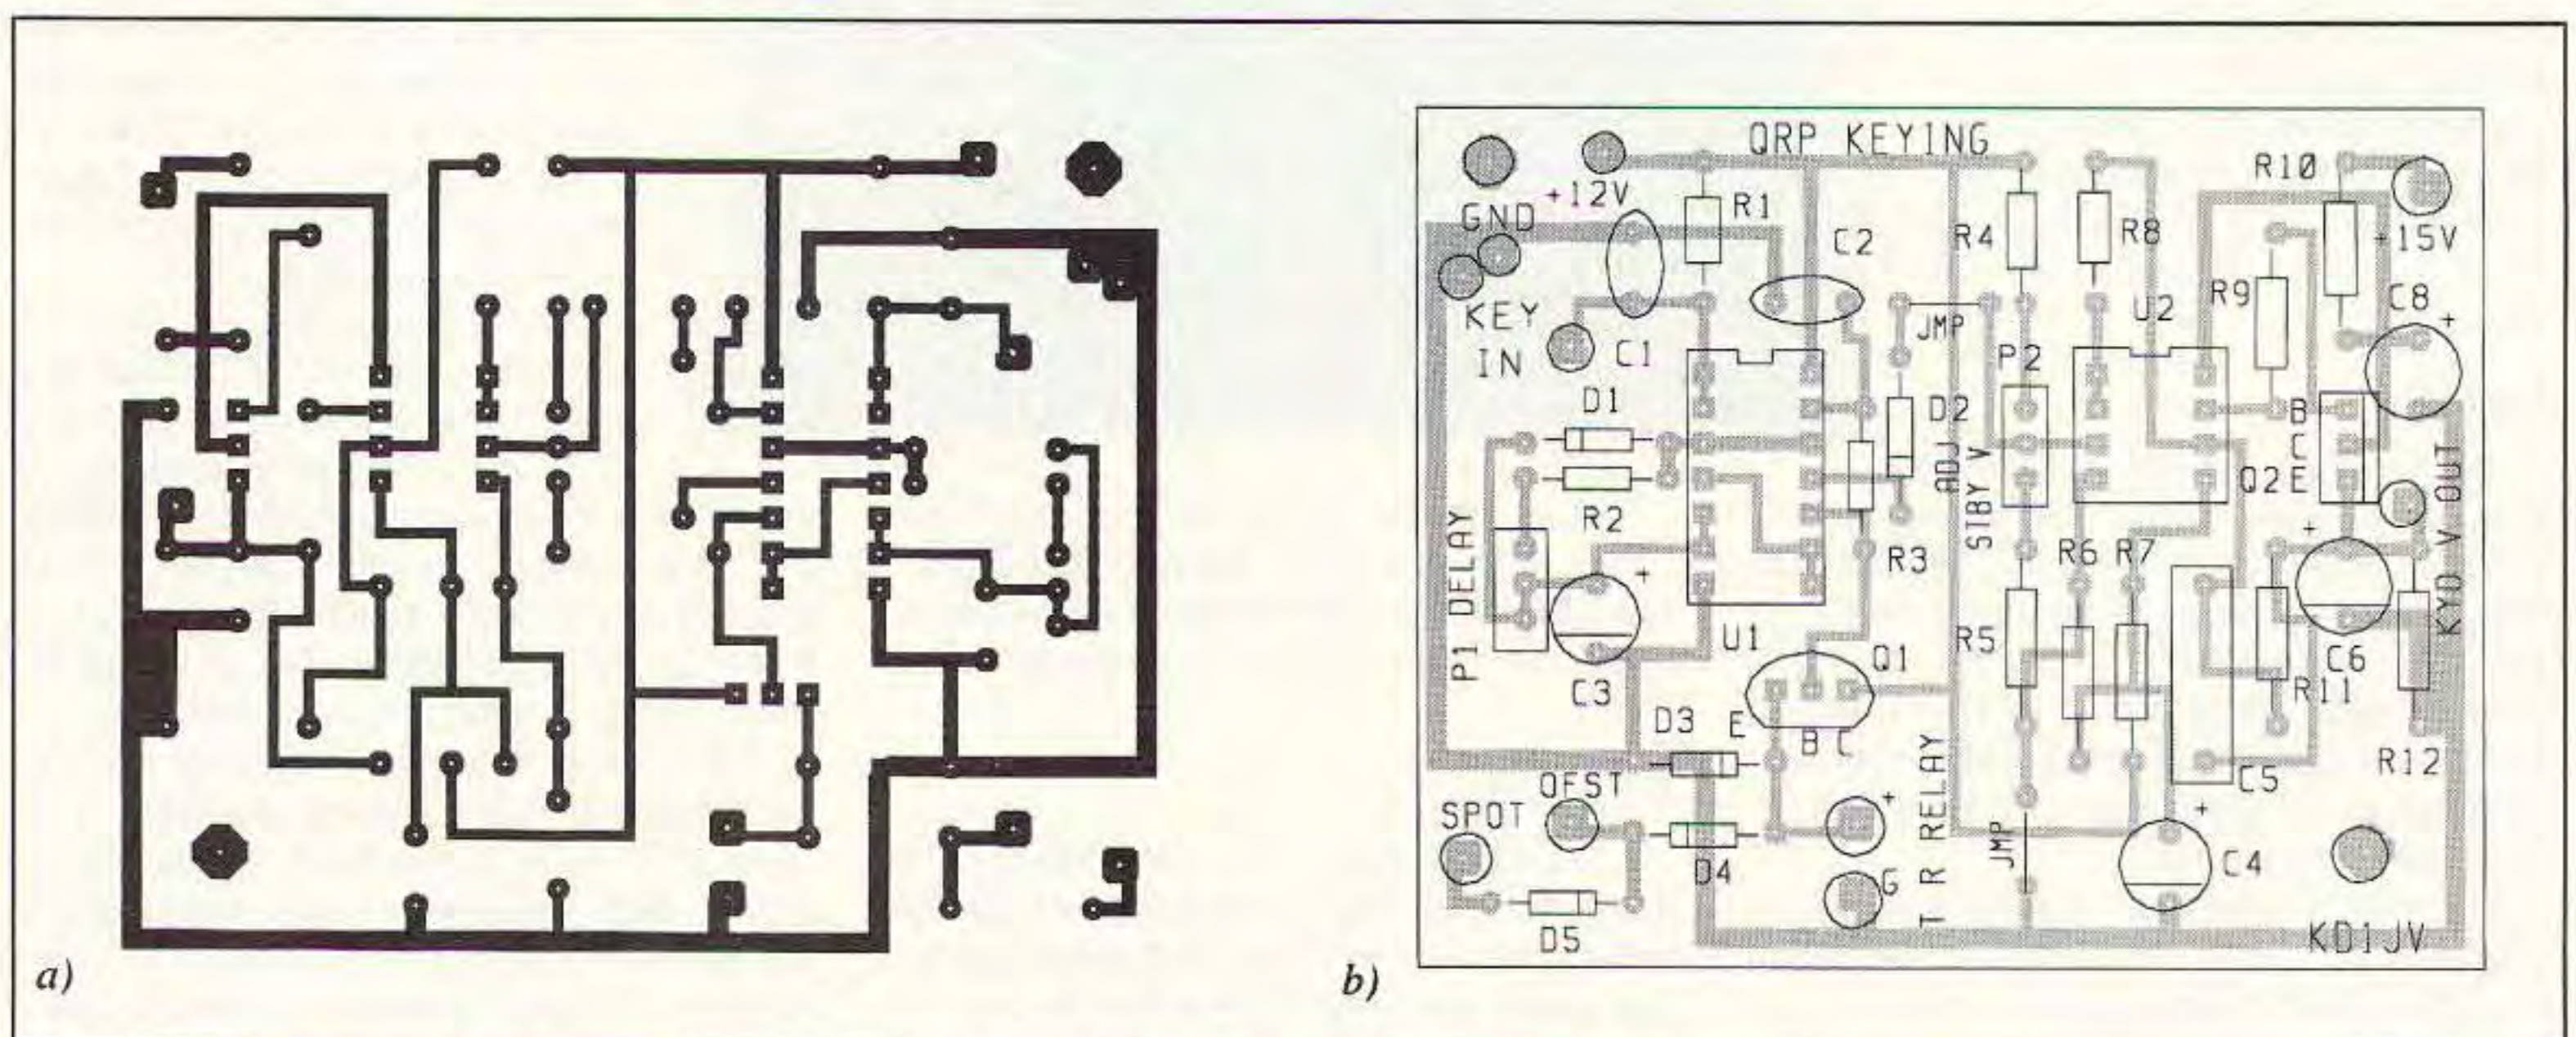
Improved QRP Keying Circuit PC board and parts placement diagram.
